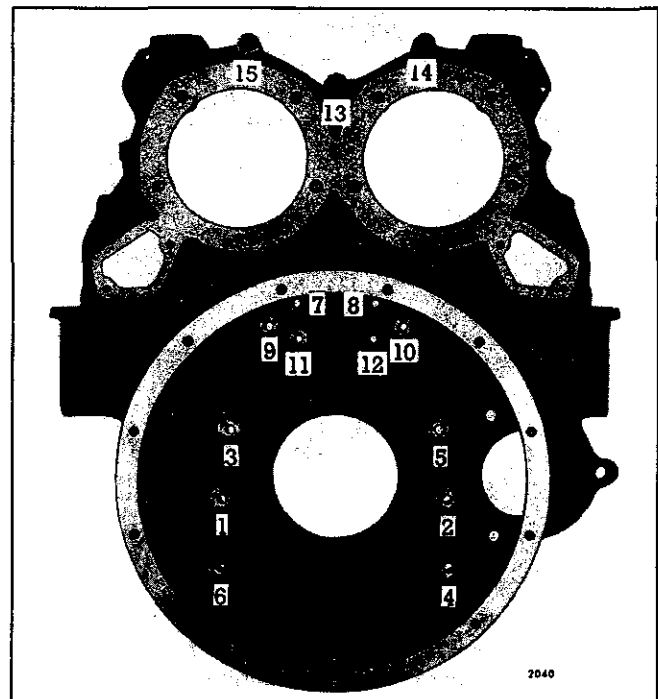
Flywheel Housing Bolt Tightening Sequence (Operation 2)—In-Line Engine
